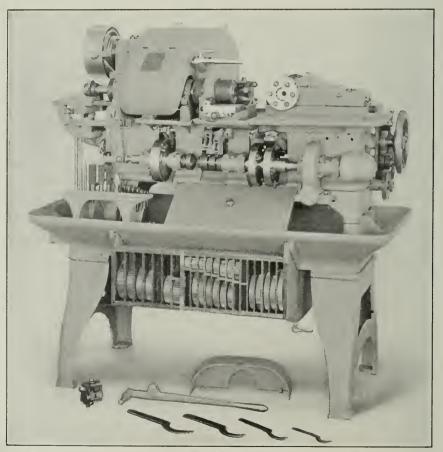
Brown & Sharpe Automatic Screw Machine with Constant-Speed Drive
